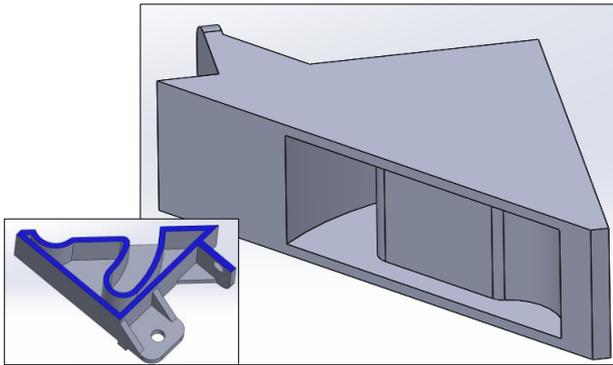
Strike component of the locking mechanism ensemble (section view in the detail)
